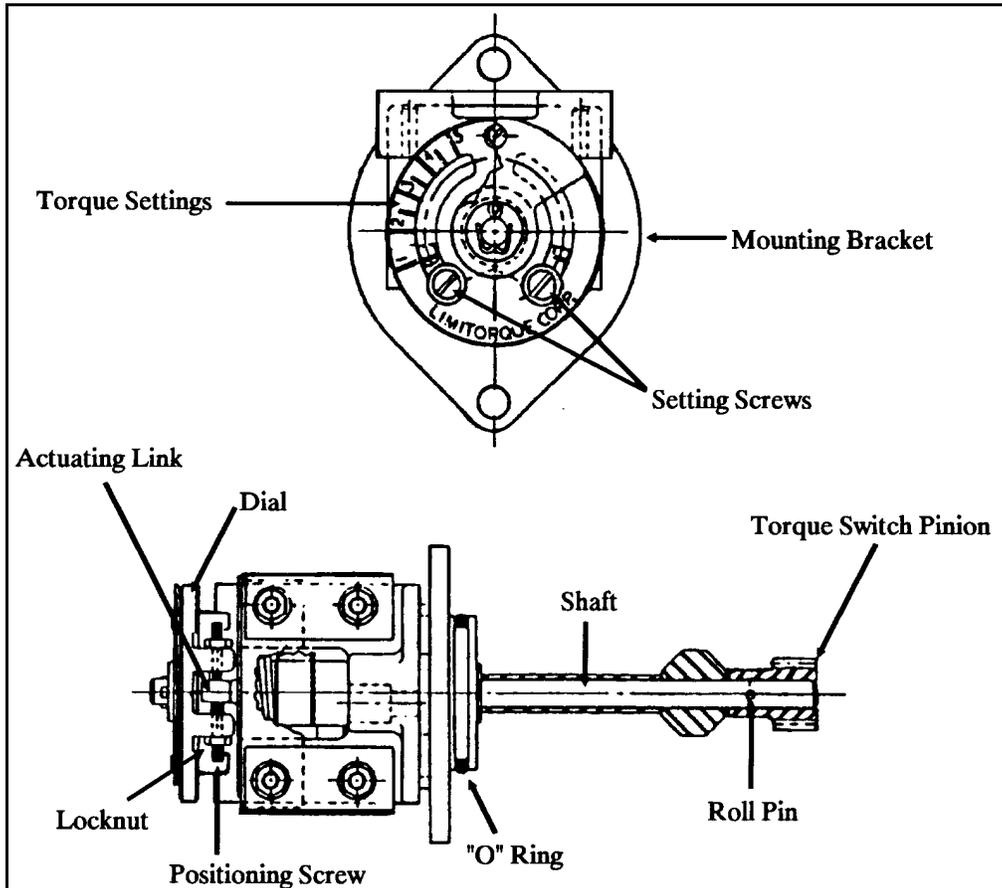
Top/Slide View of Knee Type Torque Switch
